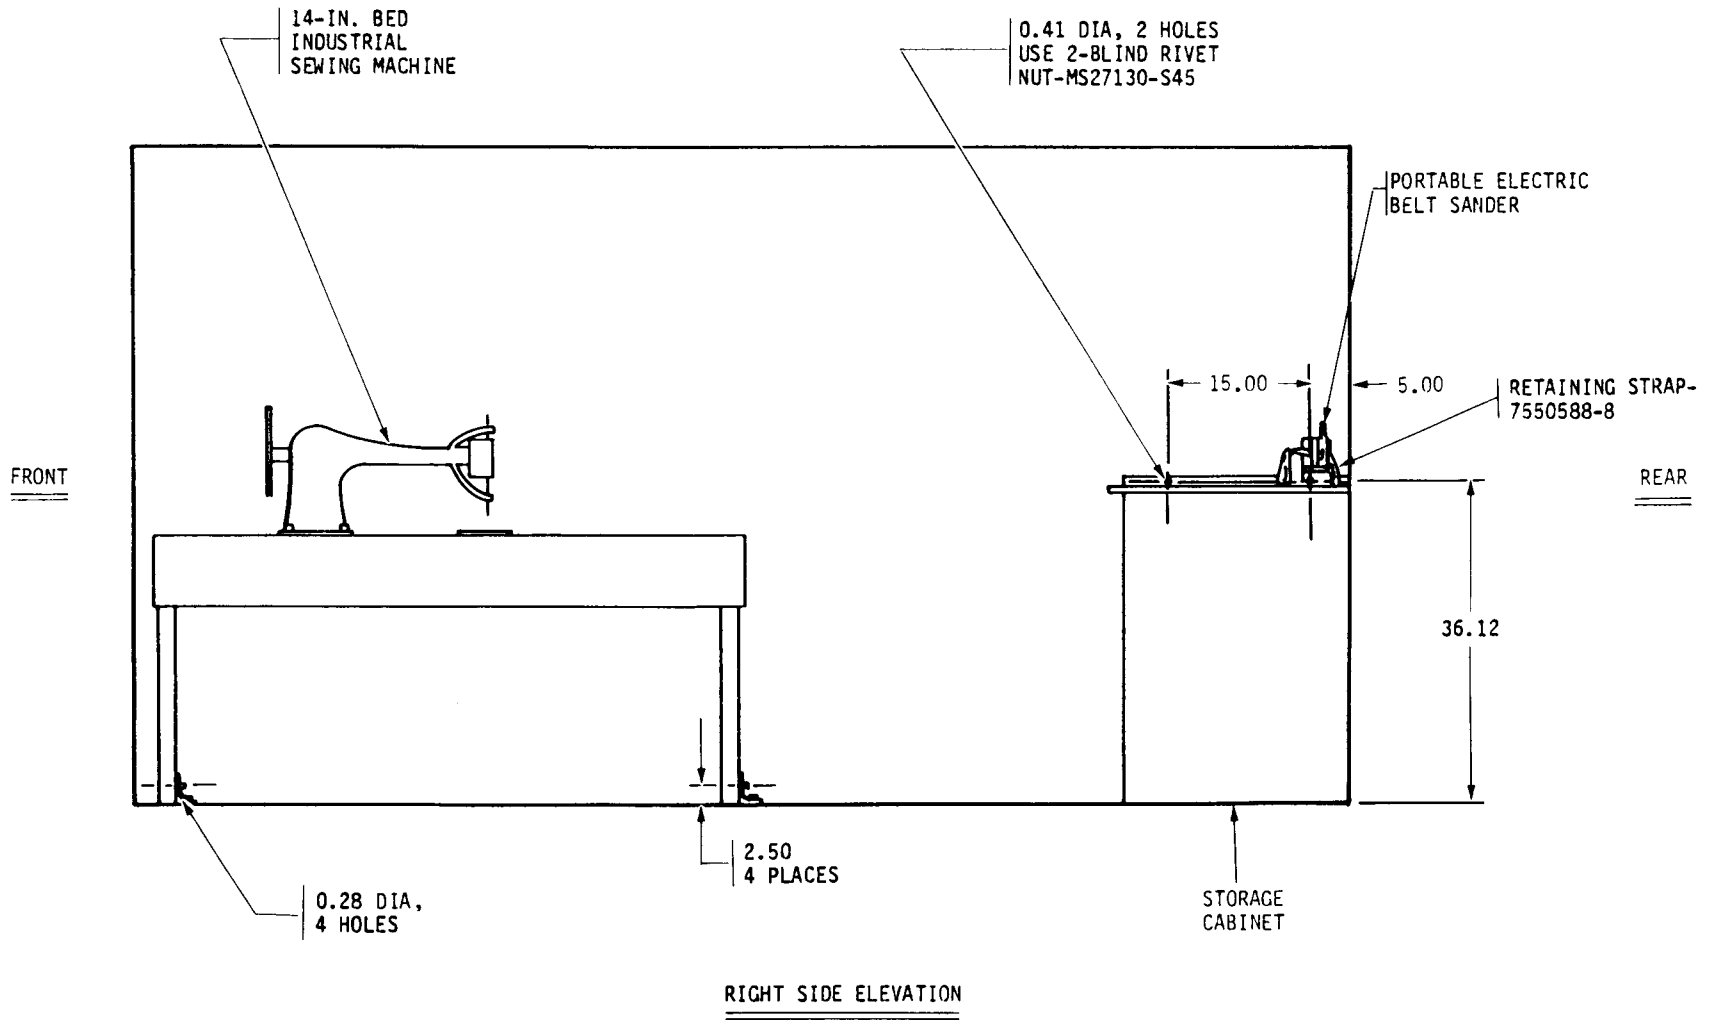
Components to be Mounted, Unit 1, 280, Right Side Elevation.
